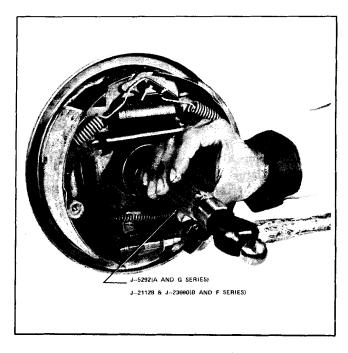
C-5 Installing Axle Shaft Bearing and Seal
